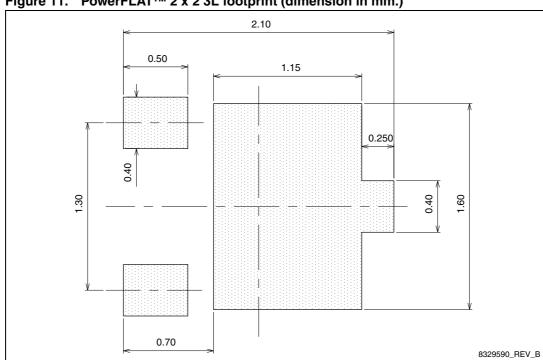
PowerFLAT™ 2 x 2 3L footprint (dimension in mm.)
